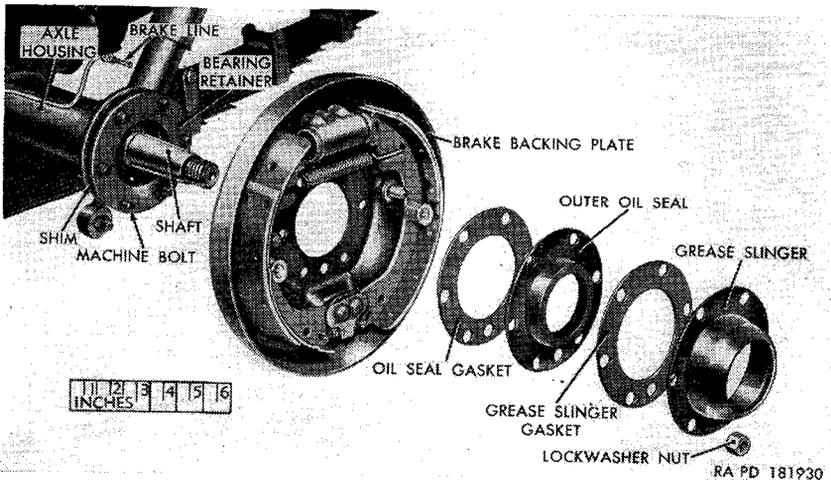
Rear axle and brake backing plate with brake shoe assemblies—partially exploded view.
